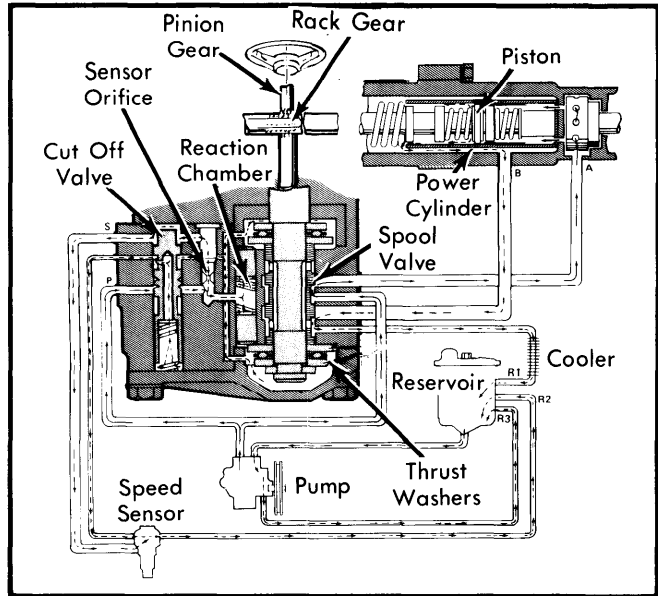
Sectional View of Power Steering Pump and Power Steering Gear
